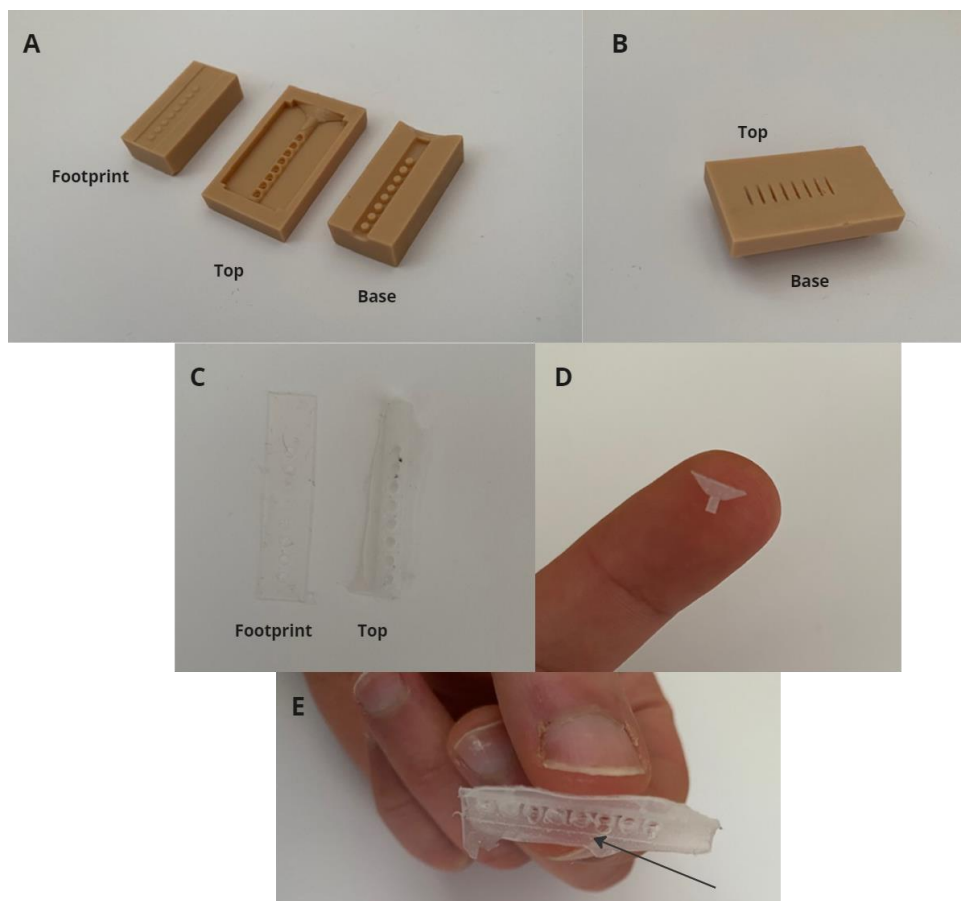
Images of the (A) the moulds, (B) assembly of the top and base part, (C) the cured footprint and top layer with the self-regulating valves, (D) the pins getting stuck in the leakage channels, and (E) not forming of the pins.
